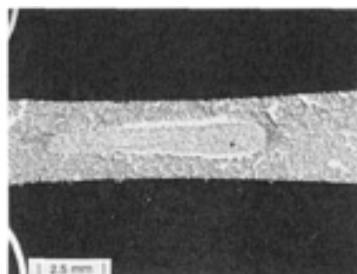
RESISTANCE SPOT WELD ON A359/SiC/10_p
